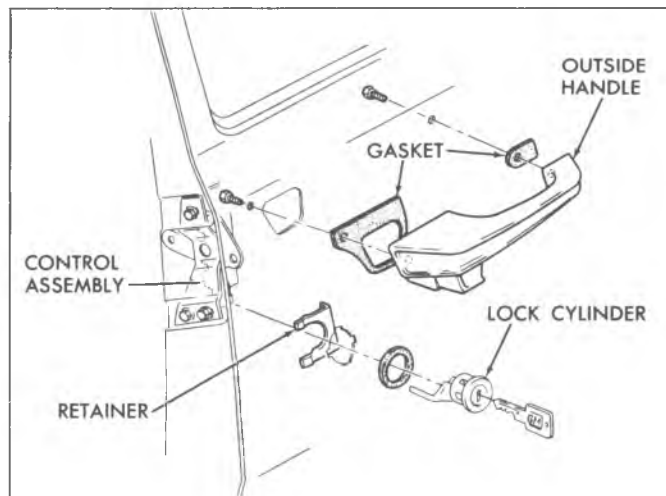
Rear Door Outside Handle and Lock Cylinder
